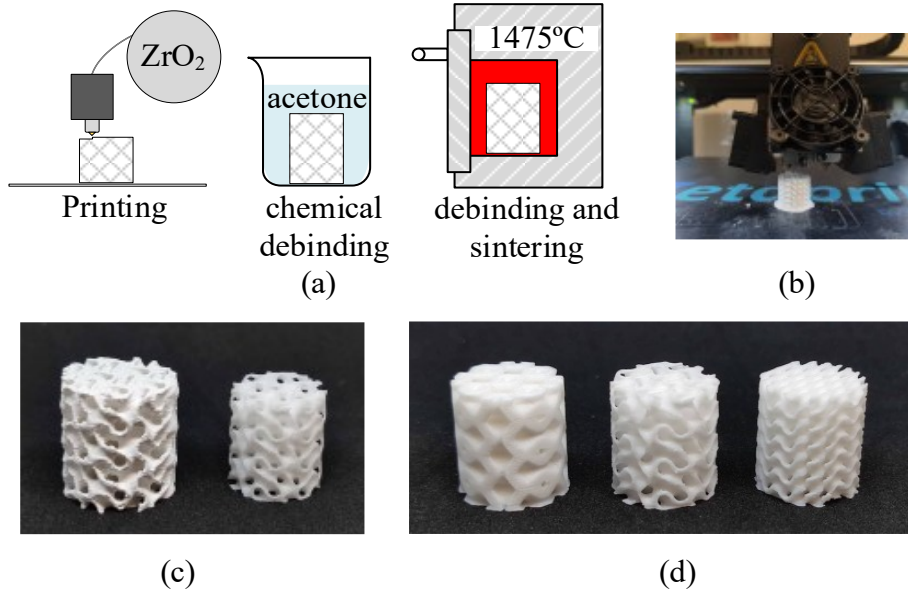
Zirconia specimens. (a) procedure for manufacturing a zirconia specimen. (b) the printing of a zirconia specimen. (c) the shrinkage of zirconia specimens before and after sintering. (d) zirconia specimens for experiments.
